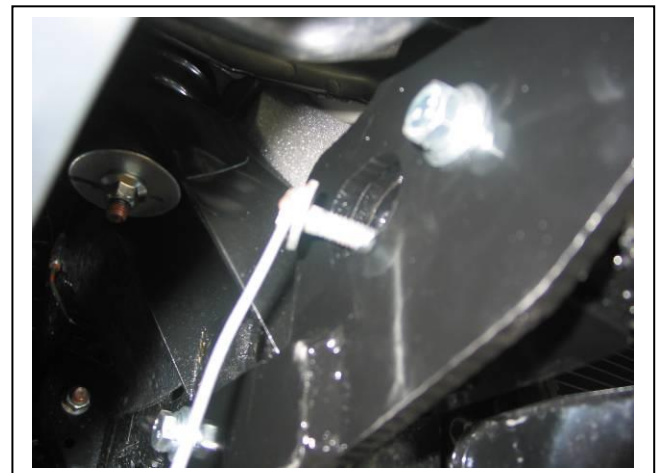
Feeding 3/8 x 1 1/2 bolt and washer on 300mm wire into chassis rail. Bend wire on bolt to suit requirements.
